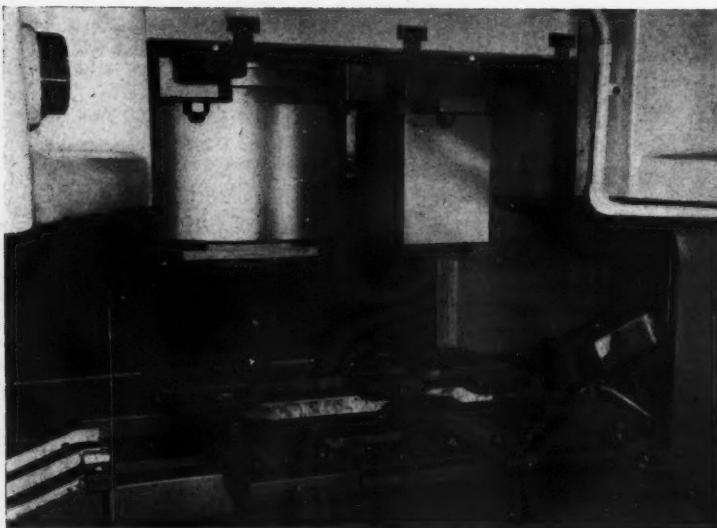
Close-up view showing the transfer equipment and tooling fitted to the forging press at the left in Fig. 1. The heated billet is first flattened to a thickness of 1.5 in. and then advanced to the final forging position
